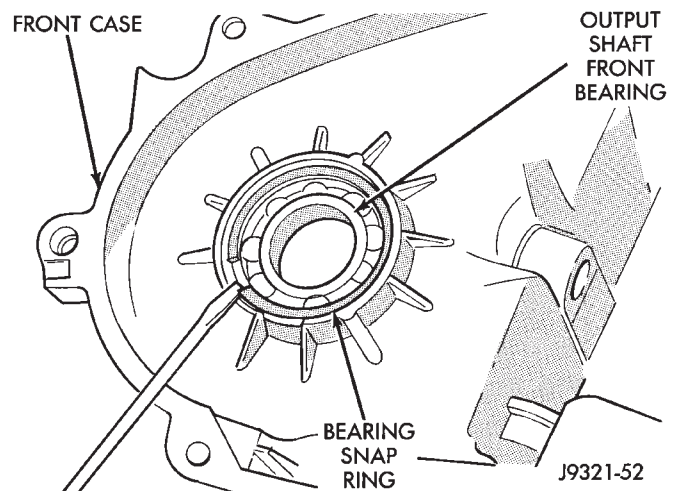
Removing Output Shaft Front Bearing Snap Ring
